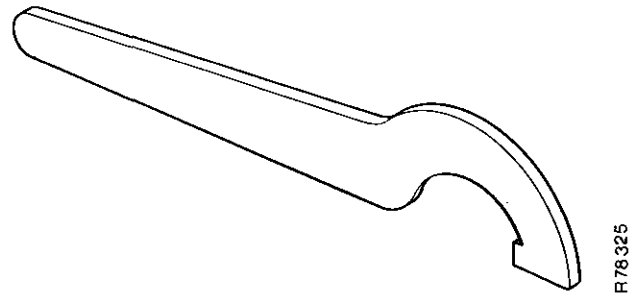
"C" SPANNER K909842 FOR RING NUT
